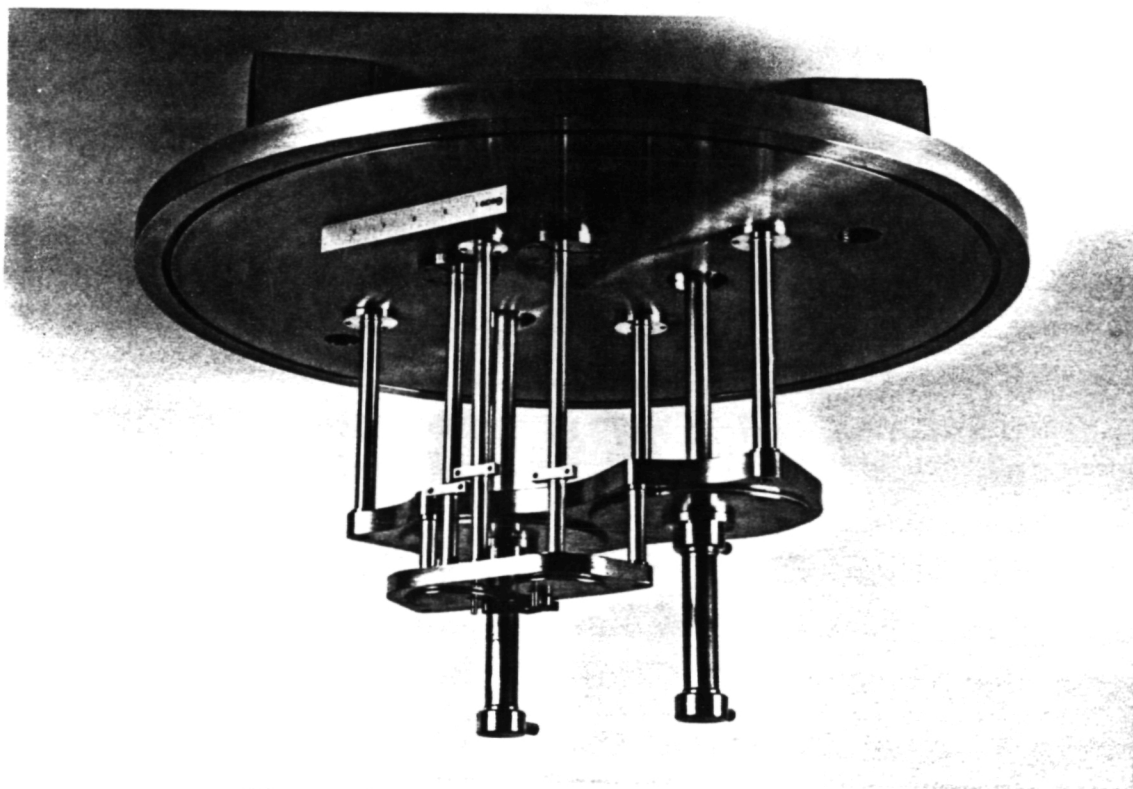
CRYOCOOLER COLD END ASSEMBLY
